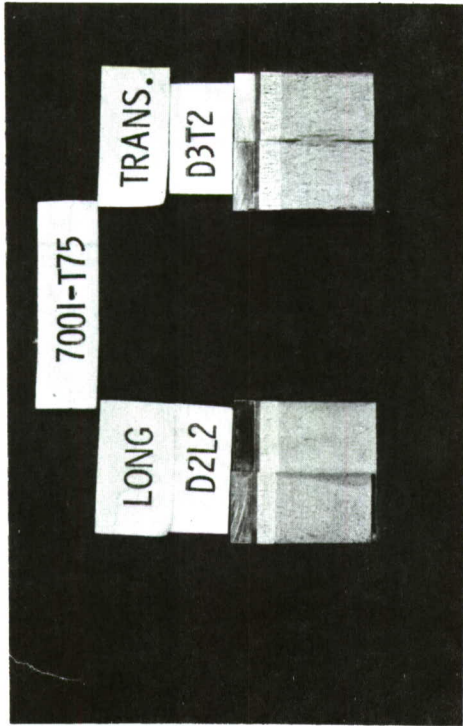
Fracture Surfaces of Representative Specimens
